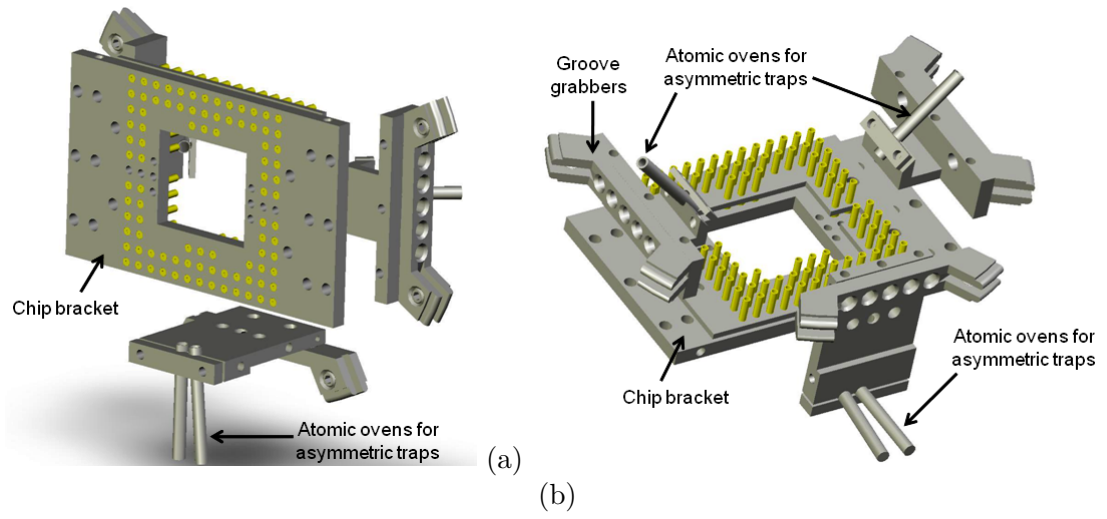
(a) Front view of custom made chip bracket and mounting position of symmetric ovens, (b) rear view of the bracket and mounting position of symmetric ovens.
